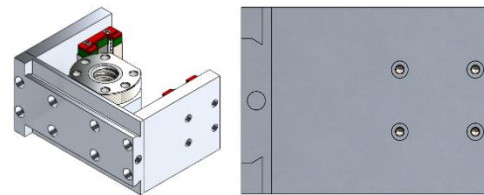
Isometric and side view of the Z-Axis Dovetail joint
